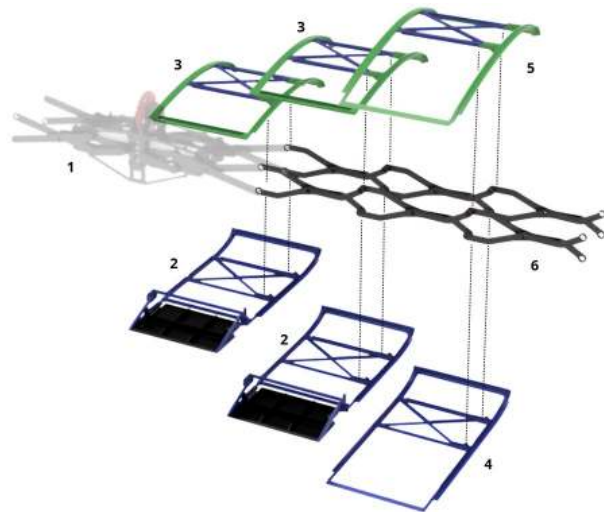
Exploded view of the retractable wing assembly: (1) deployment actuation mechanism, (2) lower surface cell with integrated flap, (3) upper surface cell with integrated flap, (4) standard lower surface cell, (5) standard upper surface cell and (6) the two sets of parallel carbon fiber scissor linkages.
